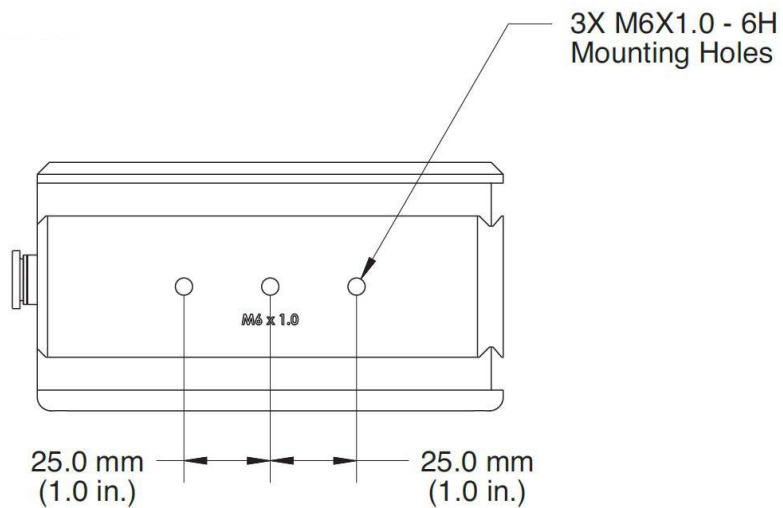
PM10K+/PM15K+ Base Unit Dimensions, Top View (in mm)
